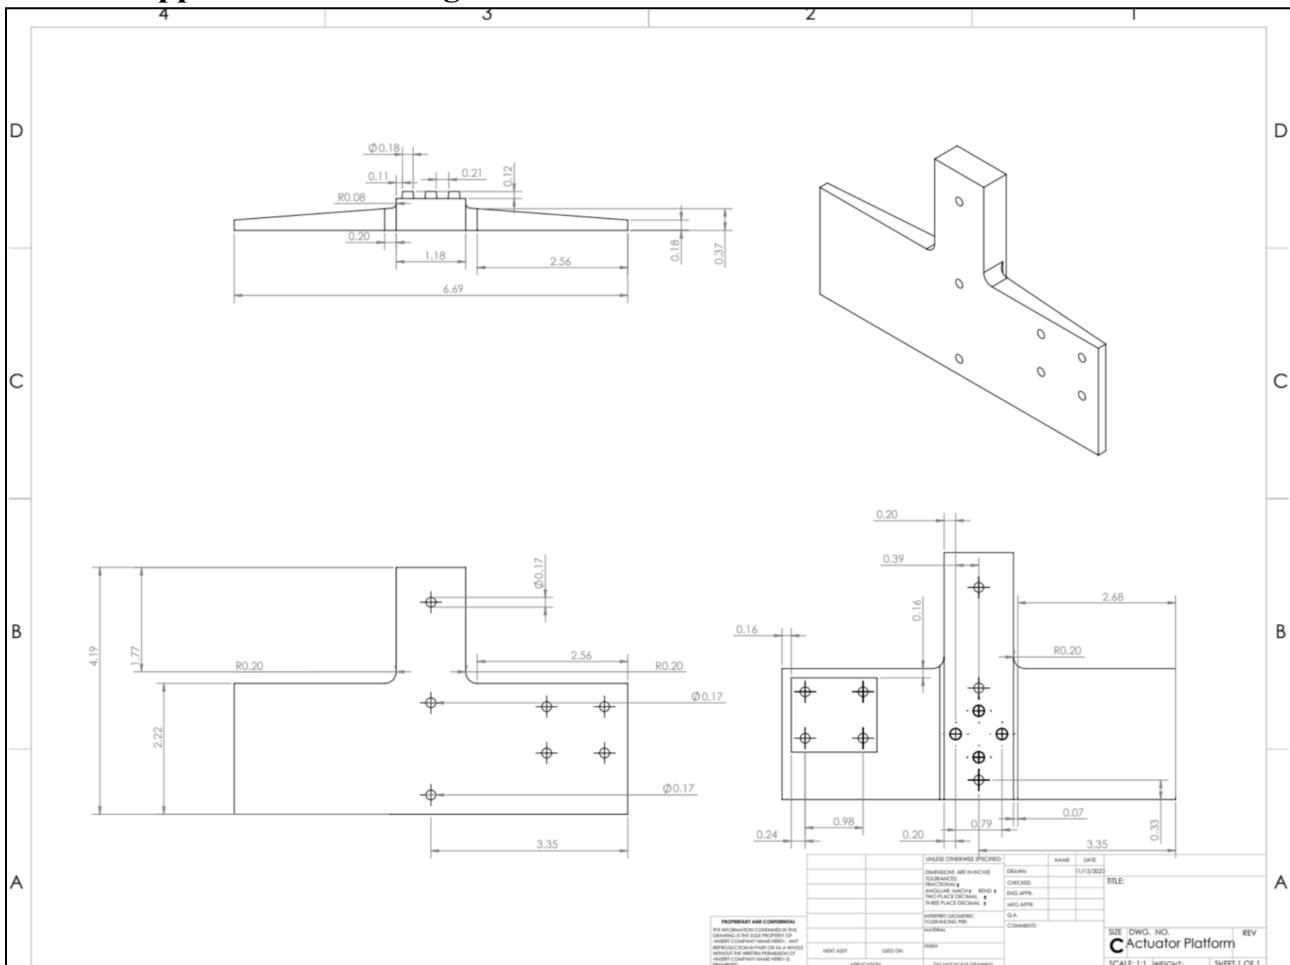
Part Drawing for the Connecting Platform to the Linear Actuator
